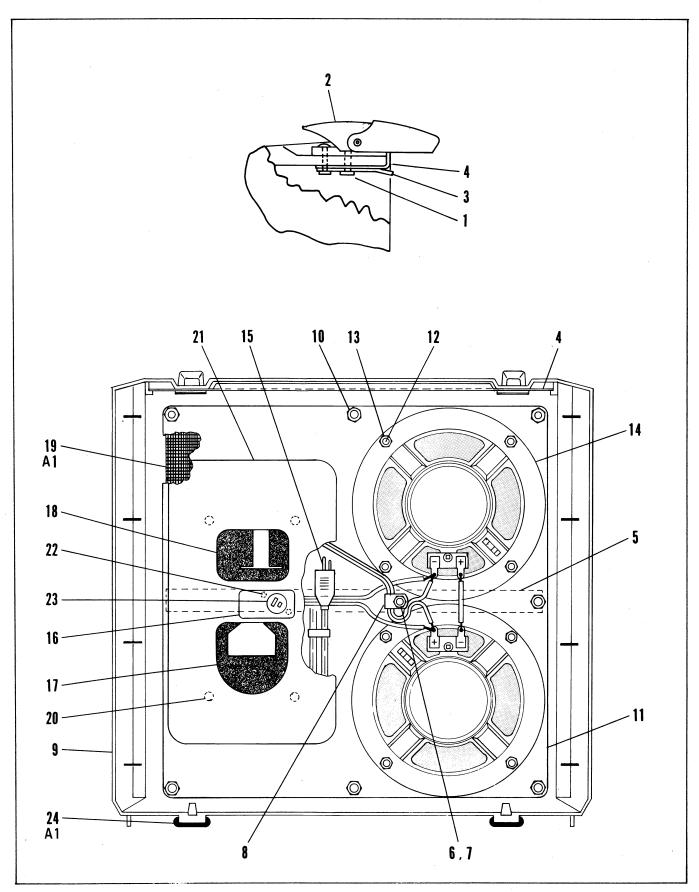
Front Cover and Speaker Assembly (1680BC and 1680EC Models Only)
